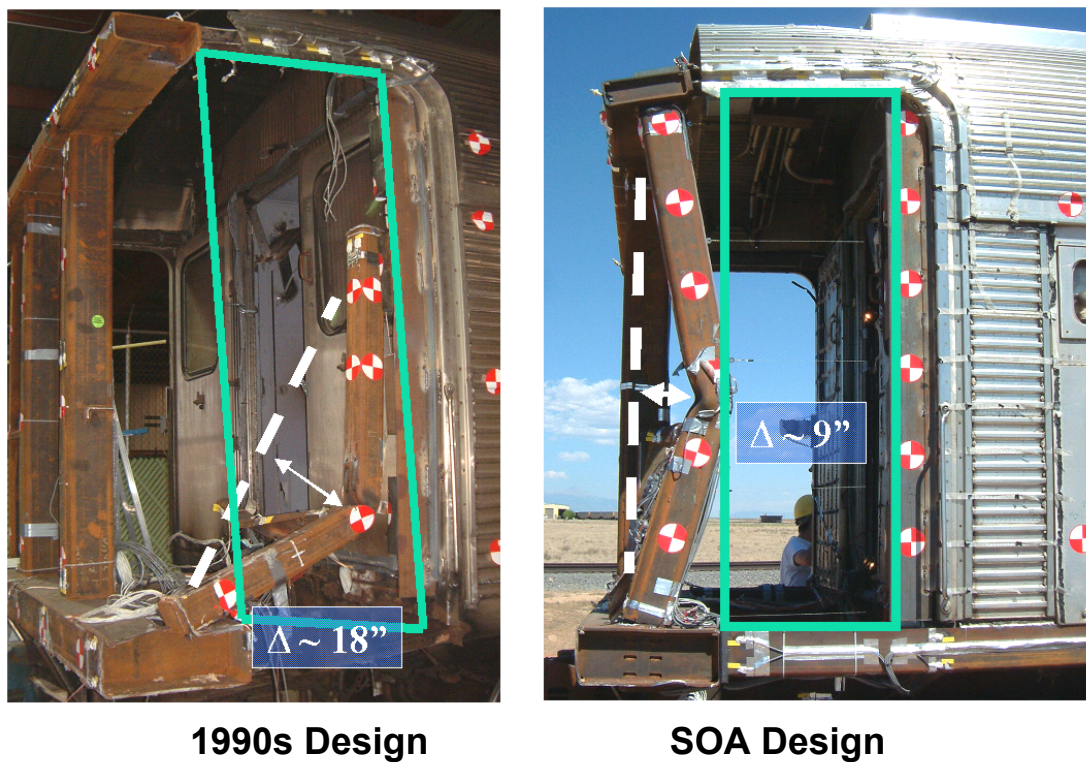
Post-Test Photographs: 1990s and SOA End Frames
